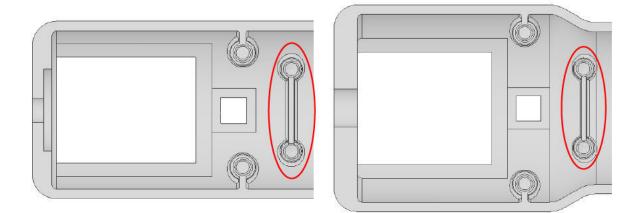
Pushbutton assembly mounting bosses on handle option A (left) and option B (right)
